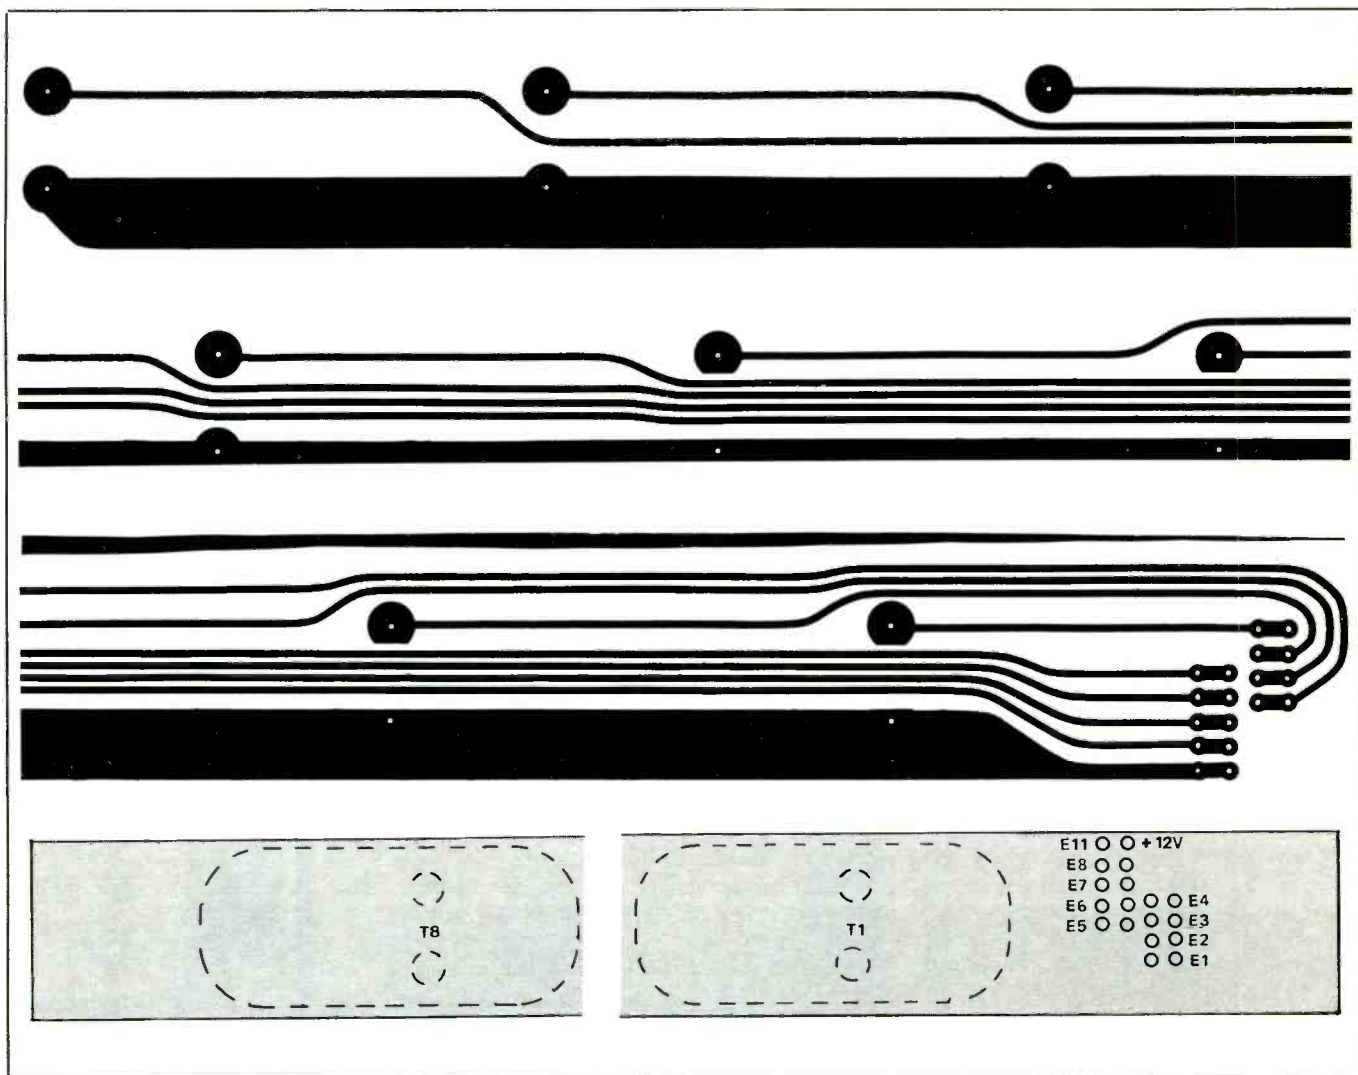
Actual-size etching-and-drilling guide and reduced components-placement diagram for the display board. To make guide the 24" length required, add 3/4" to the left end
